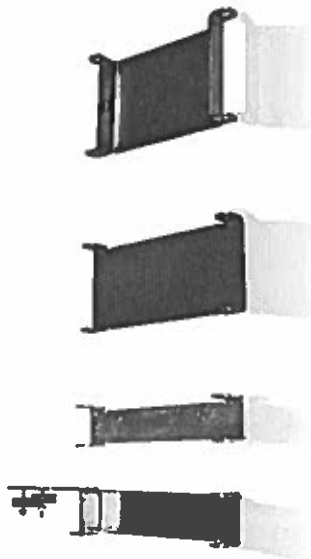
Space brackets for mounting of standard motor drive for NAL/F
